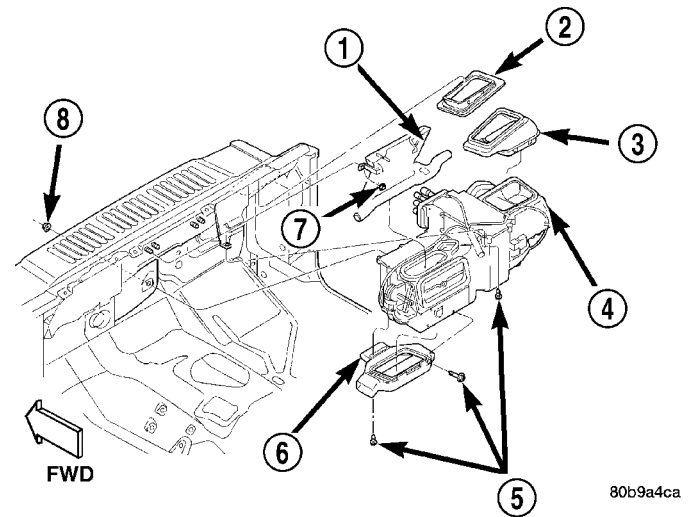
HVAC Housing - LHD Shown, RHD Typical
